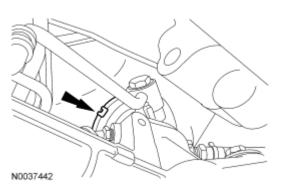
Locating Steering Gear-To-Dash Seal Clips Courtesy of FORD MOTOR CO.
